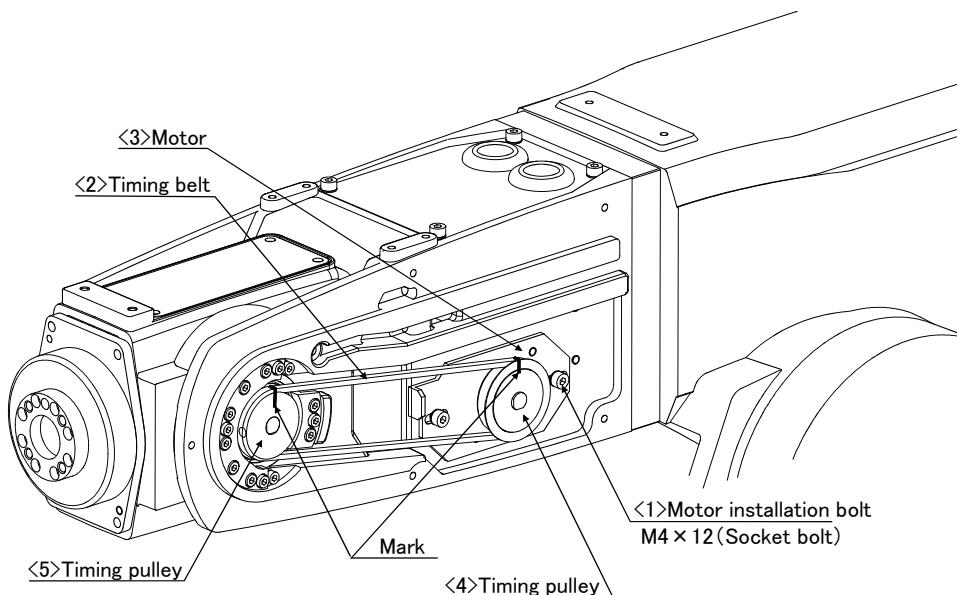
Inspection, maintenance and replacement of J5-axis timing belt
